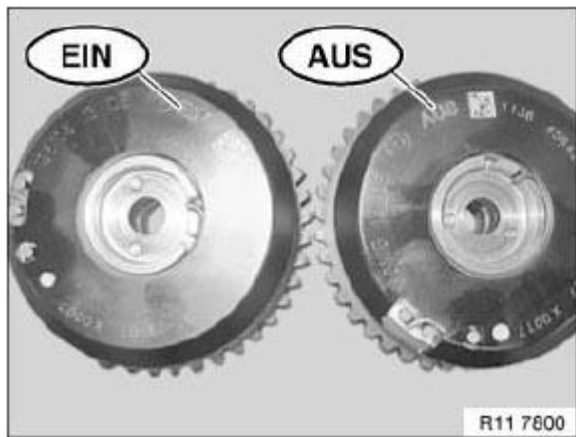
Identifying Mark On Inlet And Exhaust Adjustment Units
